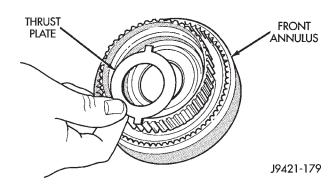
Positioning Thrust Plate On Front Annulus Support
